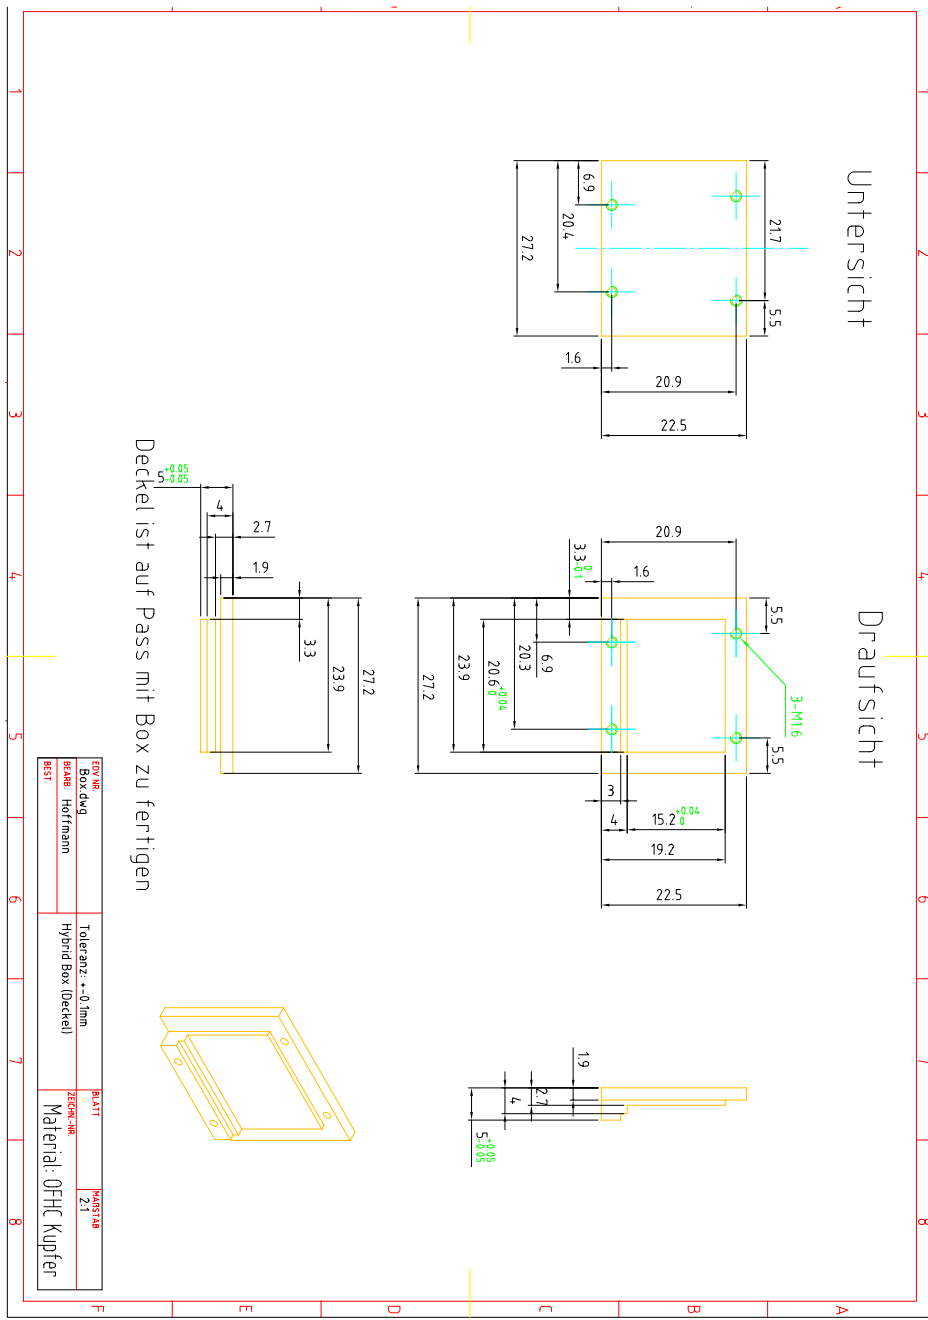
Technical drawing of the box cover. Dimensions are give in mm
